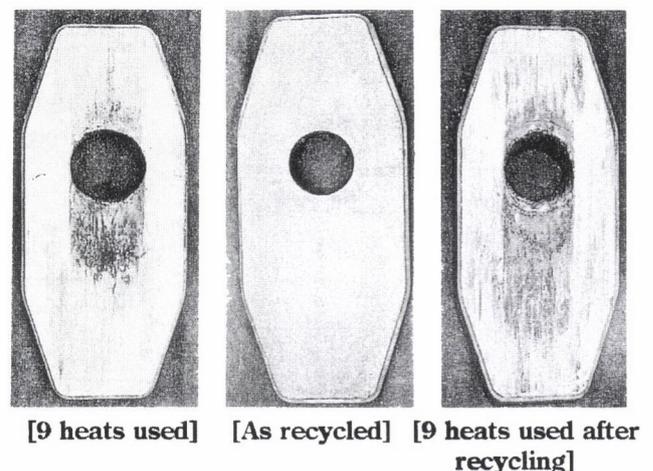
Photograph of recycled SG plate for ladle (appearance of sliding surfaces).
